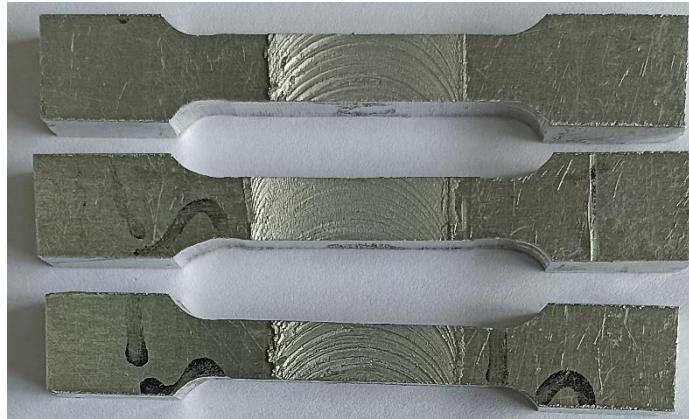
Dimension of tensile sub test specimen according to ASTM standard
